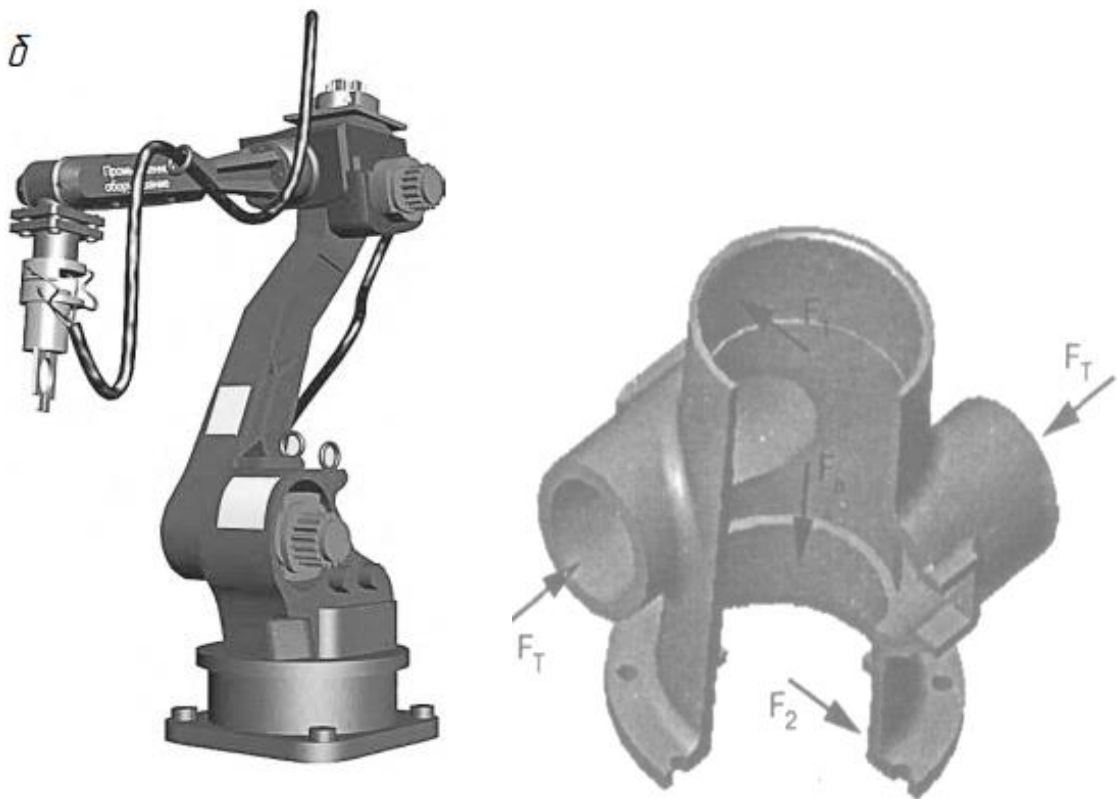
Robot structure examples (left), robot's swivel mechanism and workloads (on right)
